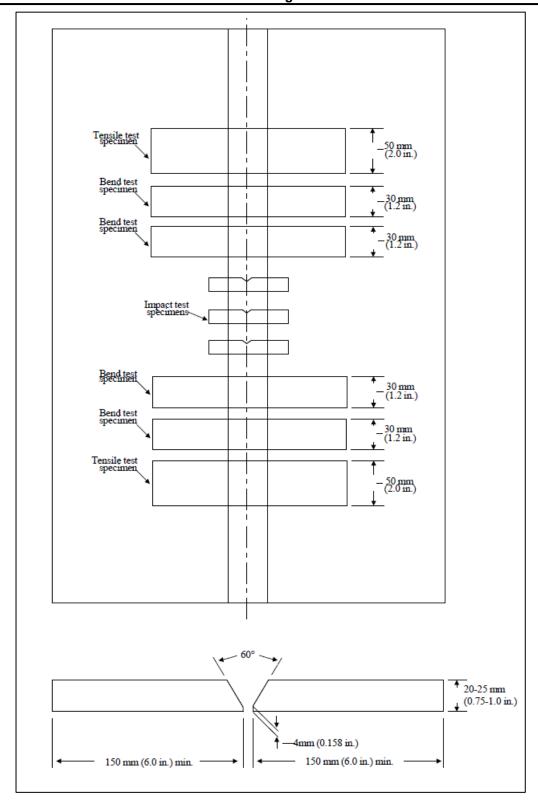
Butt-Weld Test Assembly for Submerged Arc Welding - Multi-run Technique
